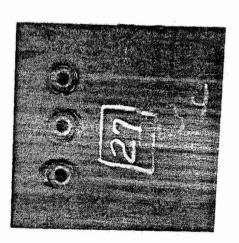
; Sealed Joint With Maximum Holes After Test With Fasteners Removed.
